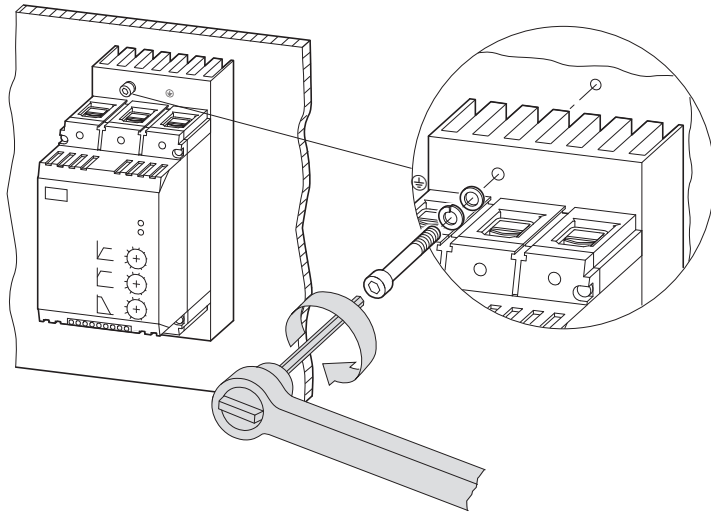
Mounting on the mounting plate with devices of 41 A and above
